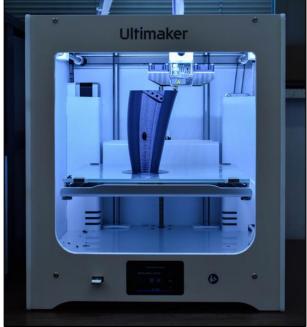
VHP socket printing on an Ultimaker 3D printer.
